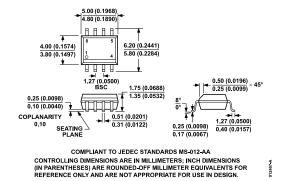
8-Lead Standard Small Outline Package [SOIC_N]
